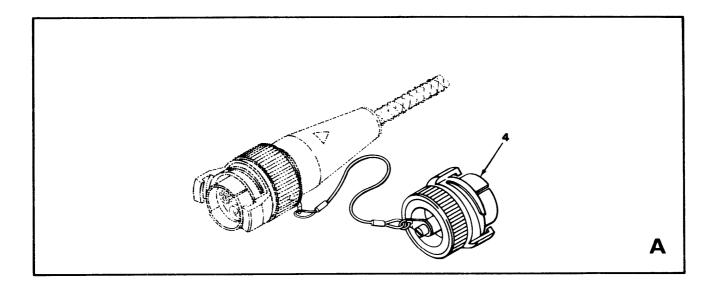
CABLE ASSEMBLY, SPECIAL PURPOSE, ELECTRICAL CX-11230A/G (1320 FEET).
